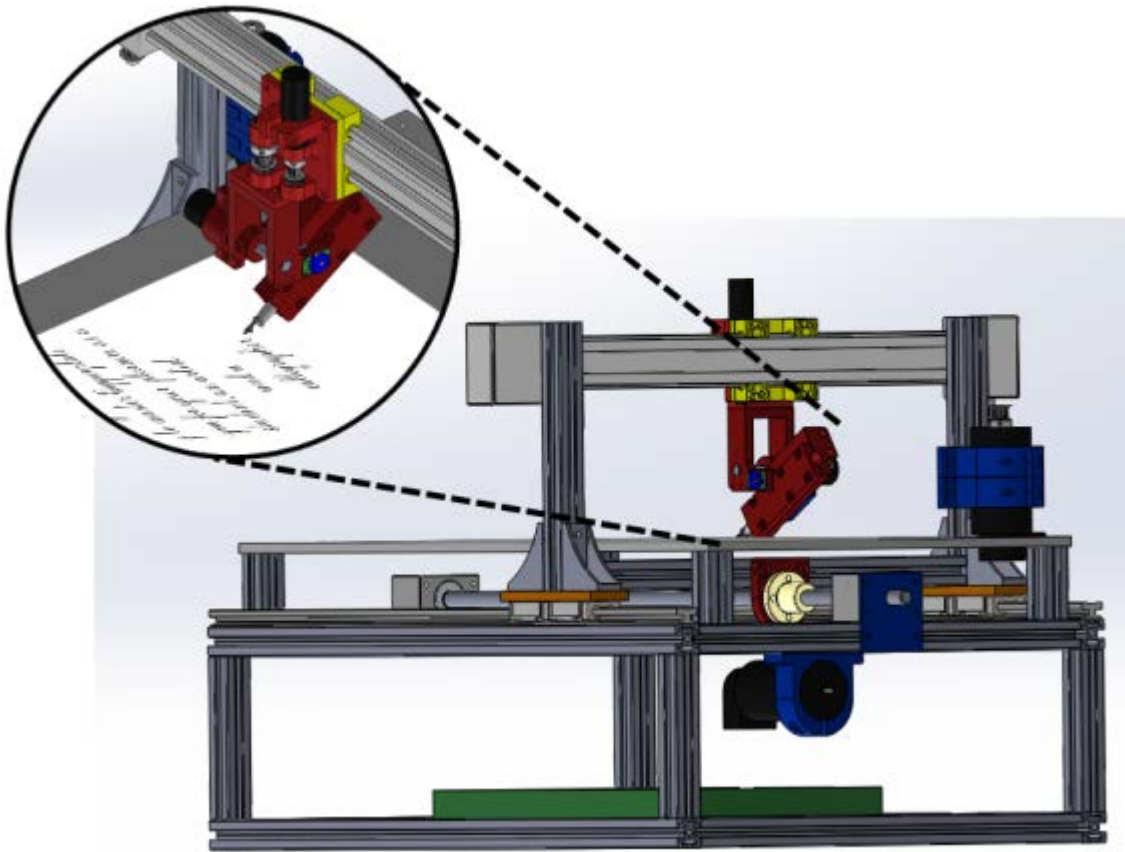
The CAD model of the complete robot design. The pen holder end-effector is shown mounted on the rotation axis in the callout. The gantry system is mounted on top of a box frame that holds the electronic boards.
